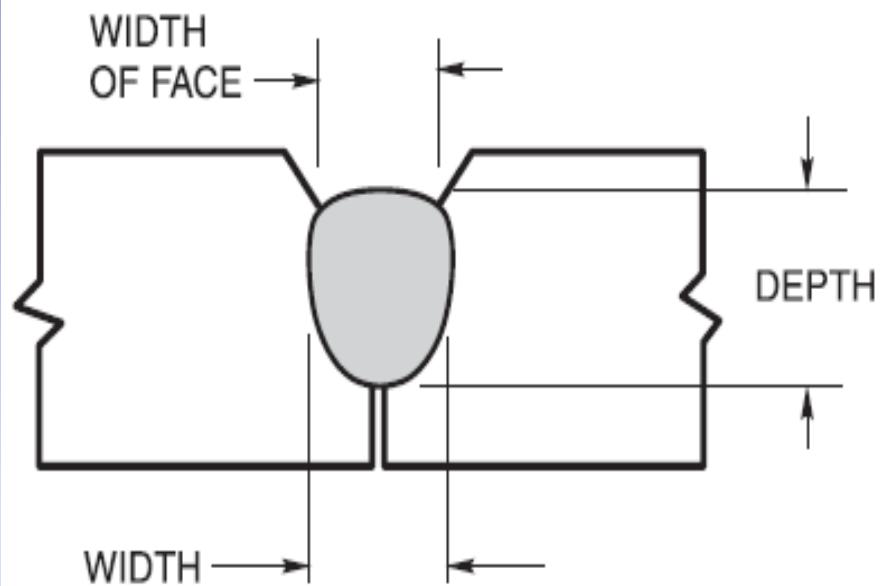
Weld Bead in which Depth and Width Exceed the Width of the Weld Face (see 3.7.2)
